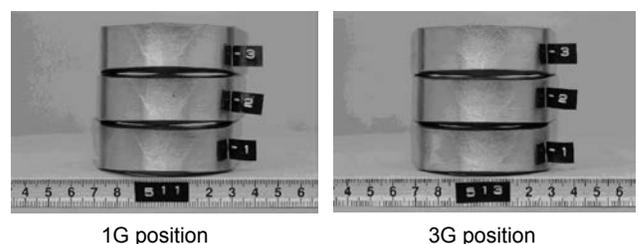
Macrostructure of DW-329AP one-sided weld joints in flat welding (left) and vertical-up welding (right) with ceramic backing and 80%Ar-20%CO₂ shielding.
